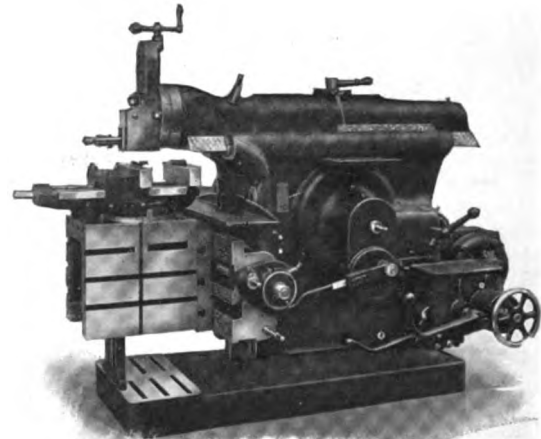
28" Shaper—Motor Drive—Gear Box Side
